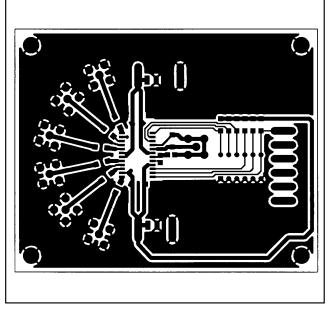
MAX4135 EV Kit PC Board Layout—Component Side
